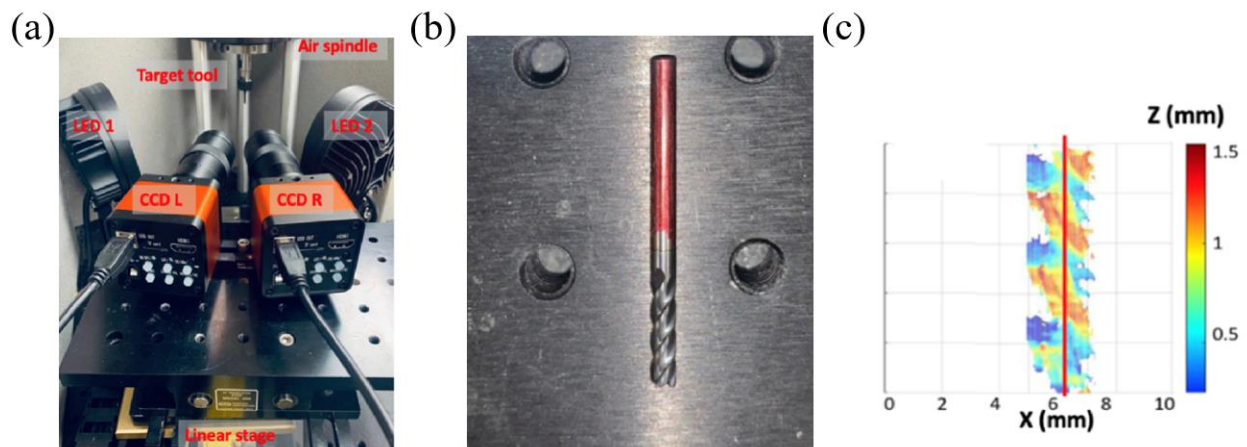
(a) Experimental setup of the proposed method, (b) Experimental target end mill sample, (c) Phase-locked surface map of the end mill [43].
